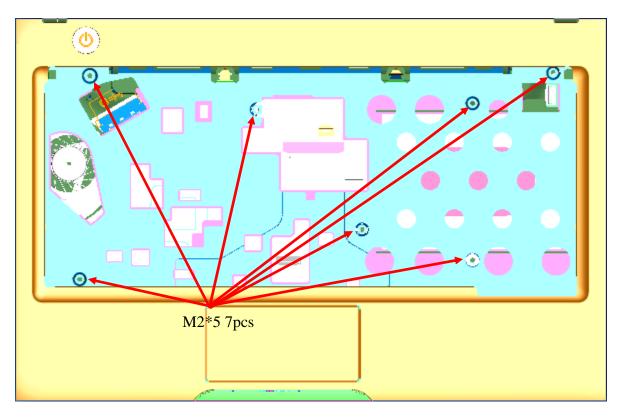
Remove the screws (front) and Top cover assembly
